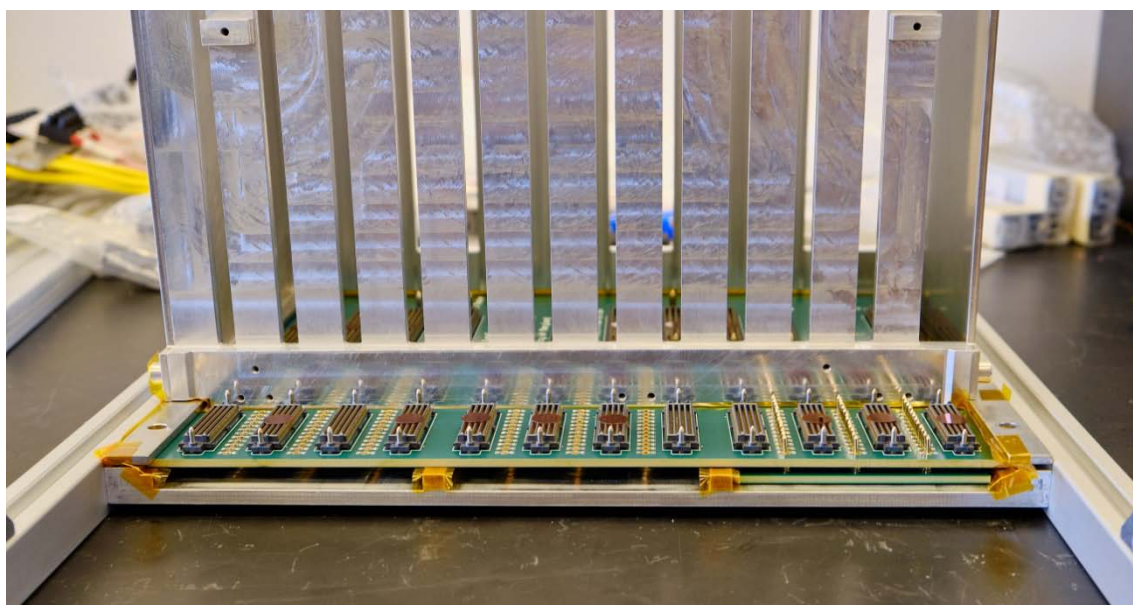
DCB card guide pressing backplane against base plate [39]
